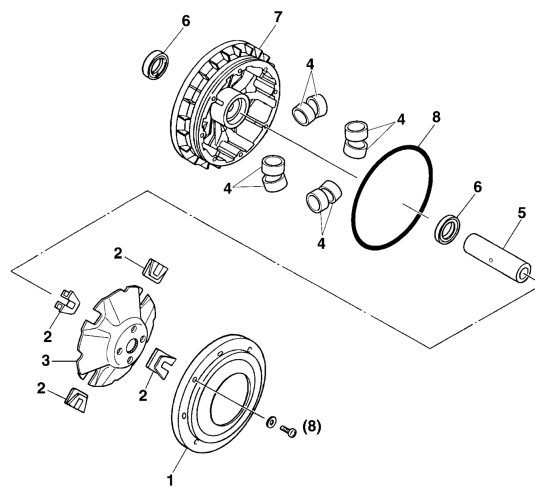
Primary pulley assembly [10, p. 5-51]
